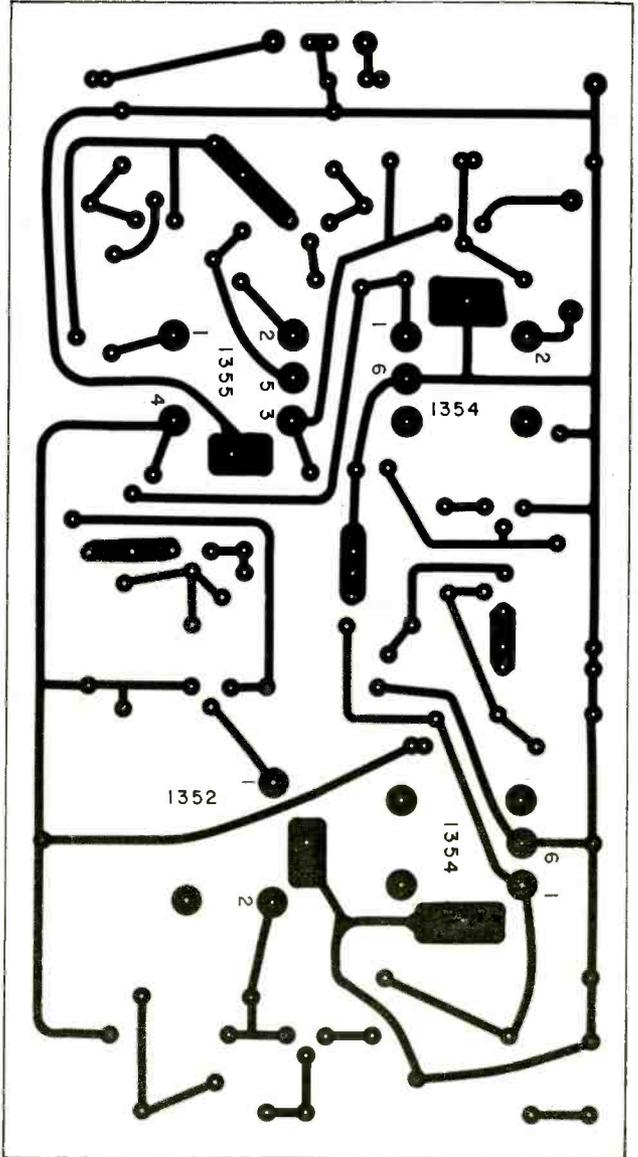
Actual size of the printed circuit board. Materials are available from your local parts distributor to enable you to make your own board. Or undrilled boards having both sides printed in foil, as shown here and in Fig. 5, can be purchased directly from the author.
